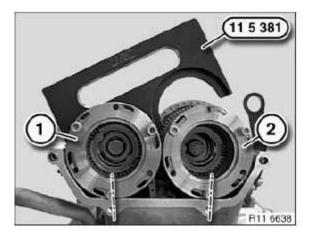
Identifying Inlet VANOS Gear And Exhaust VANOS Gear Courtesy of BMW OF NORTH AMERICA, INC.
